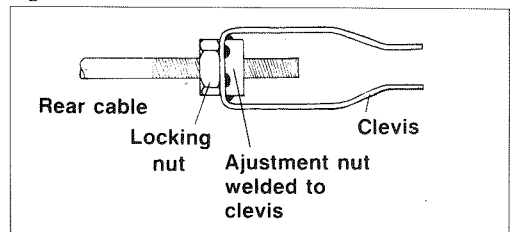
Rear cable adjustment is eased by welding adjustment nut to clevis.
